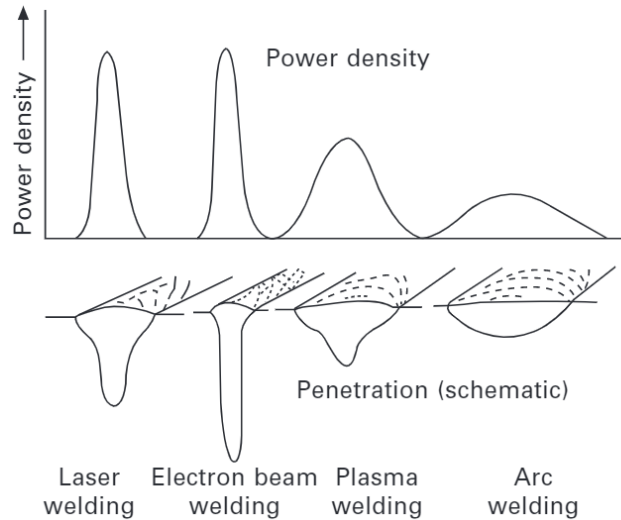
Weld pool depth of a variety of welding processes [17]
